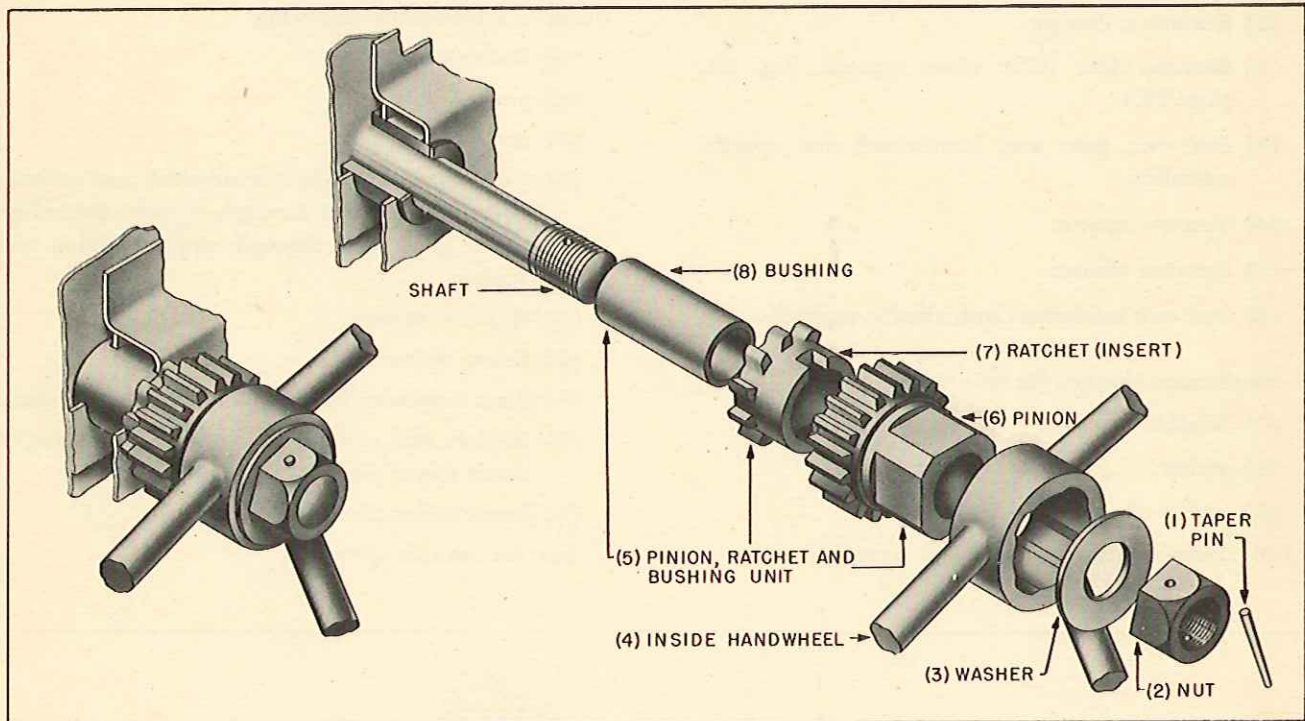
Ratchet (insert), assembly and exploded views, TLD-2(crs) door.
